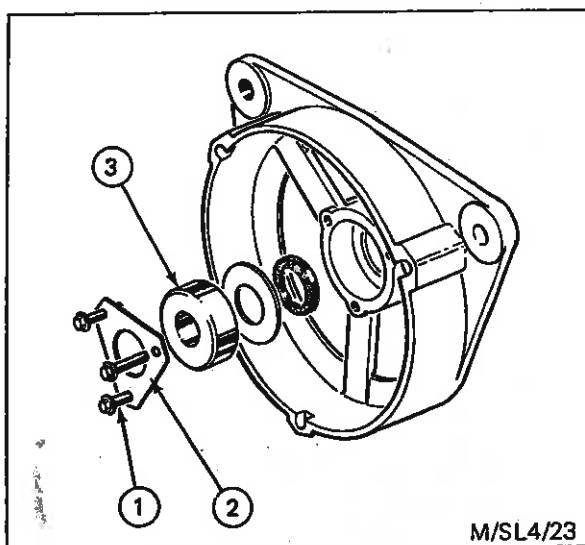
Drive End Bearing Renewal - A133 Alternator
